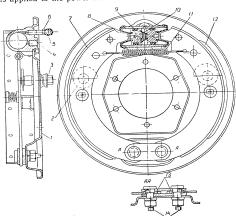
Wheel Brake I — Brake shield, 2 — adjusting eccentric, 3 — eccentric head, 4 — wheel cylinder, 5 — cap, 6 — bleeder valve, 7 — front shoe, 8 — housing, 9 — piston, 10 — spring, 11 — pull back spring, 12 — rear shoe, 13 — locating eccentries, 14 — pirs.
